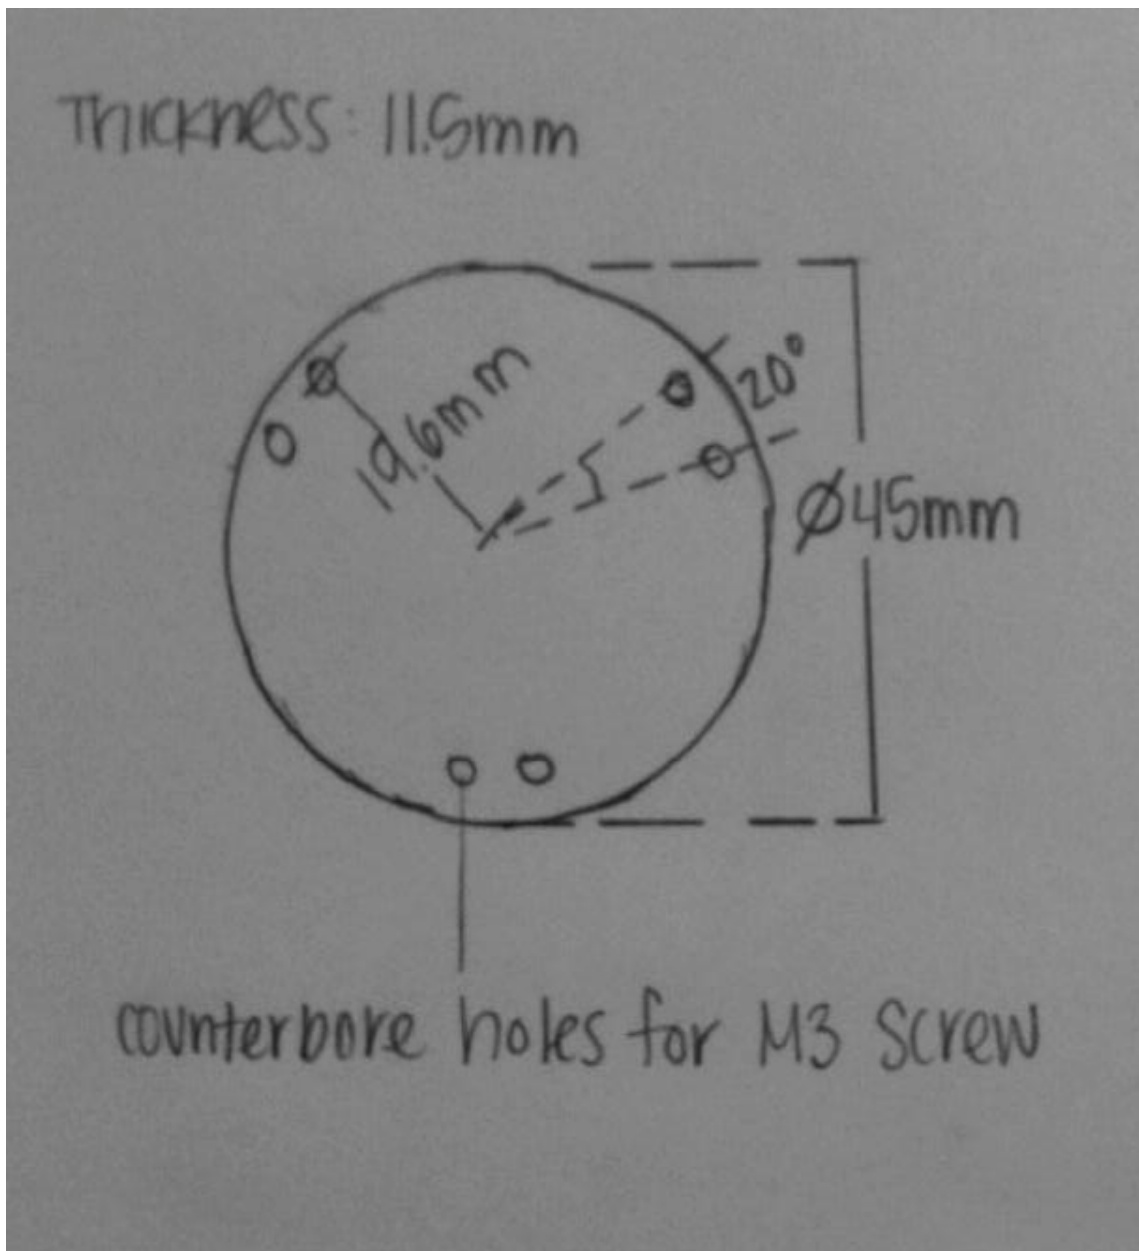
Machine drawing of force sensor mounting plate - robot side.
